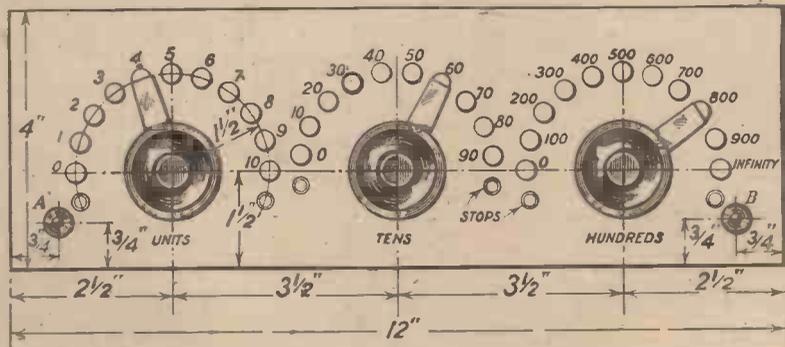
The panel layout is clearly shown in this diagram. Note the switch arm stops.
